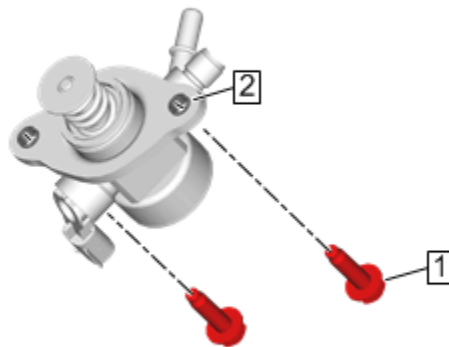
Fuel Pump Bolts And Fuel Pump Bolt Retainers
